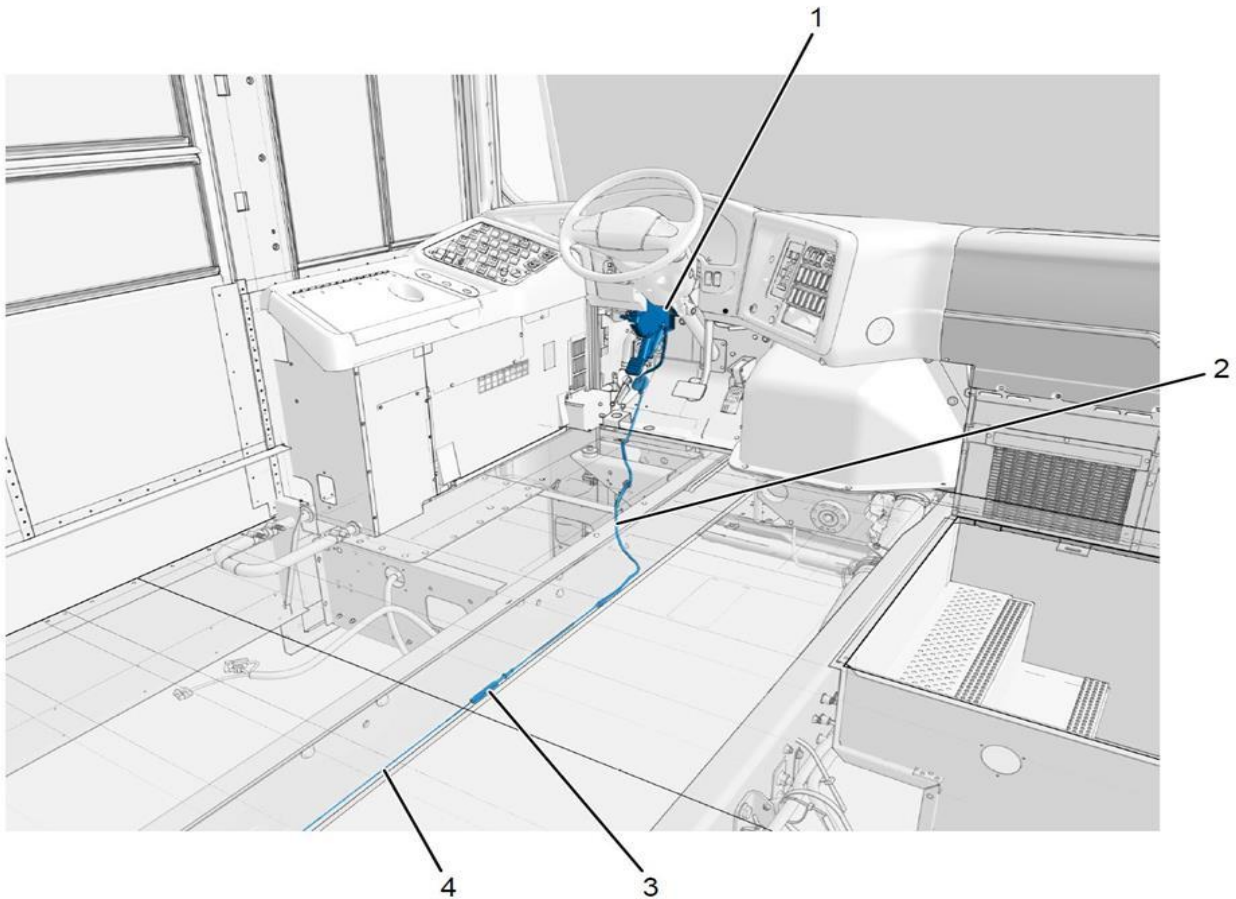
Parking Brake Assembly, Front Cable and Turnbuckle
